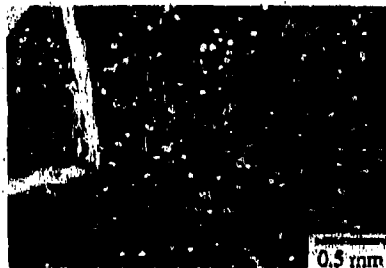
Fracture surface of weld failure in CDWed 8009/SiC/11p.
